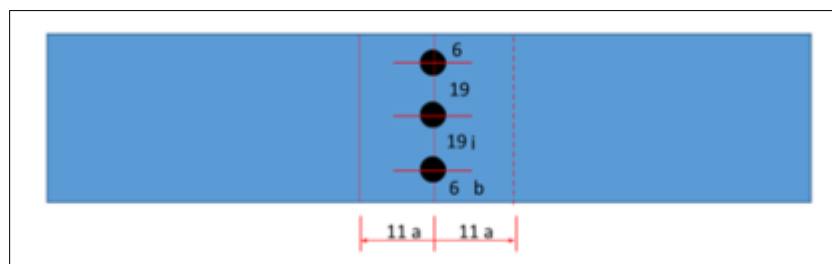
Dimensions and positioning of the test specimens and spot welds: (a) overlapping of the material, (b) distance between the edge of the plate and the spot weld, (i) distance between the spot welds. Measures in millimeters
